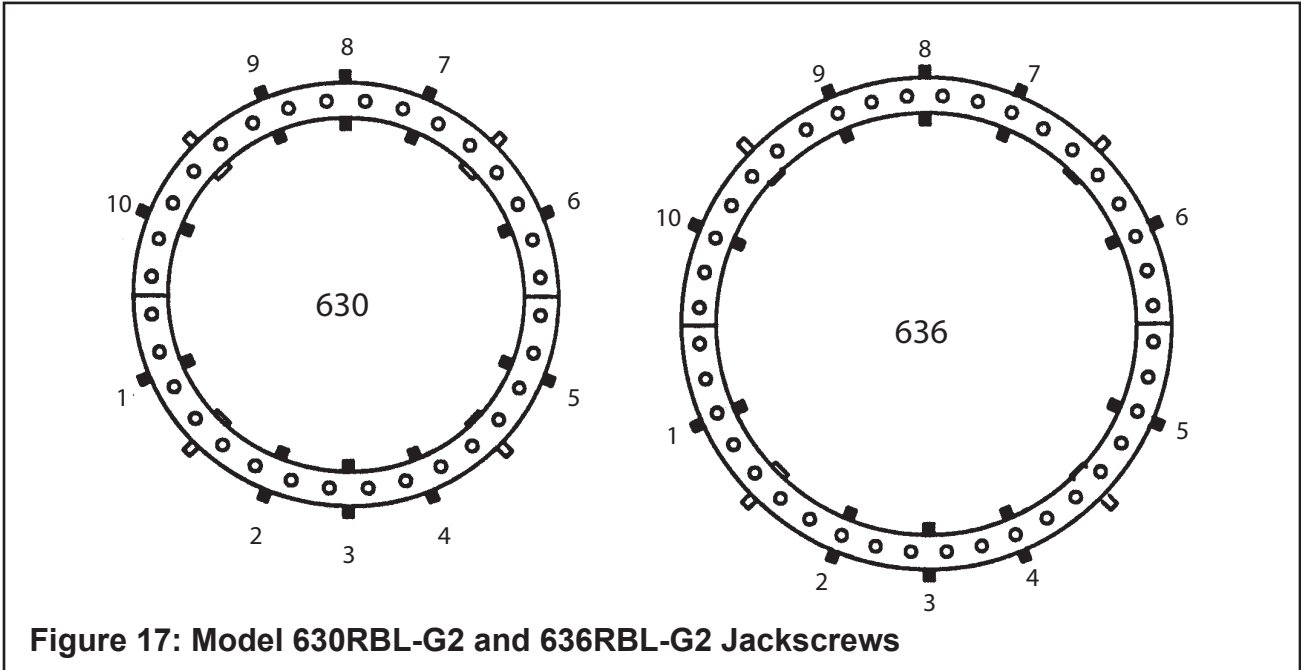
Model 630RBL-G2 and 636RBL-G2 Jackscrews
